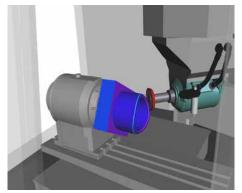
Extended machine simulation with 3D model and grinding wheel during corner bevel processing
